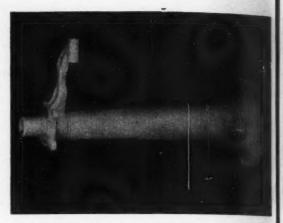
Fabricated axle housing for passenger car incorporates cast hub and spring perch
